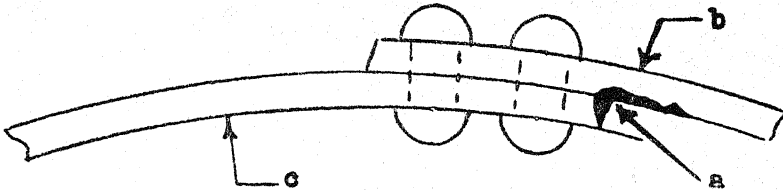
Grooving, in riveted boiler, usually occurs along horizontal lap joints.
